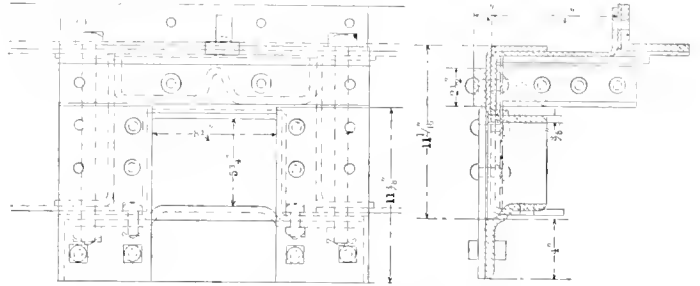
END SILL AND STRIKING PLATE CONSTRUCTION ON SECOND LOT OF GONDOLA CARS (O-14).
